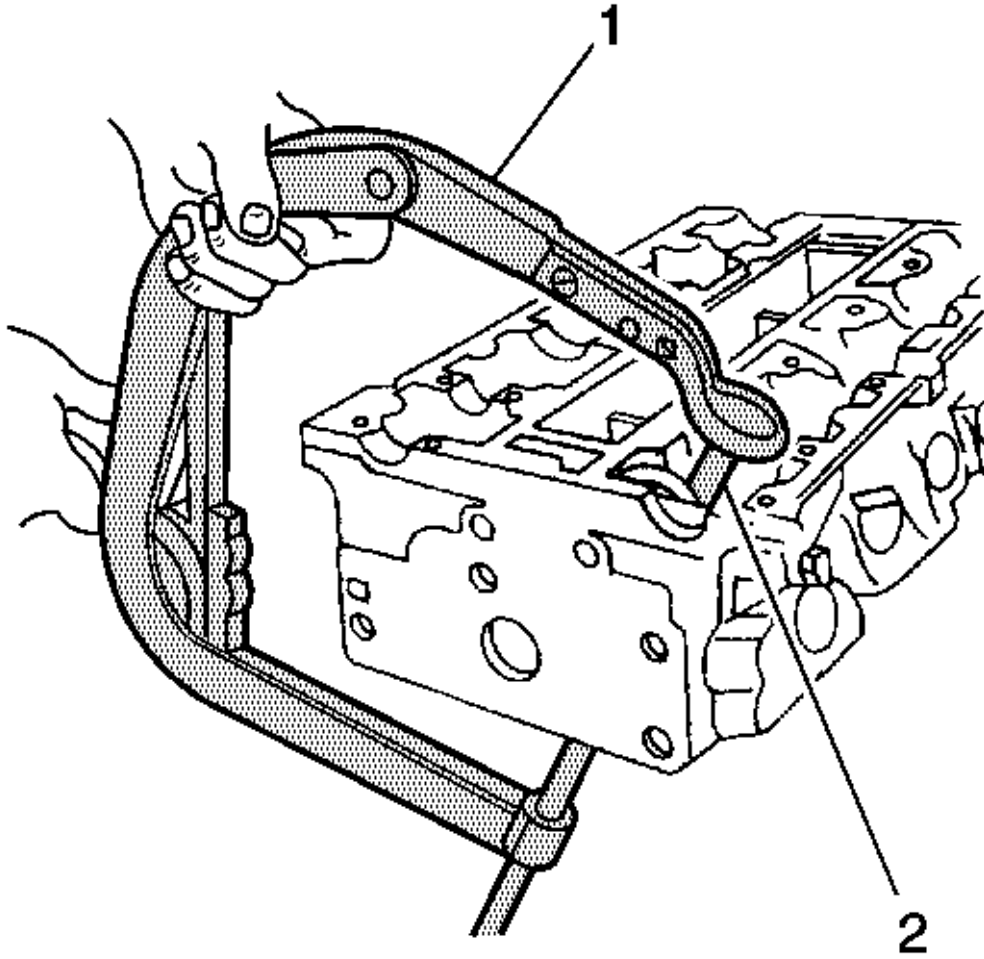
View Of J 8062 And KM-653-A Valve Spring Compression Tools
